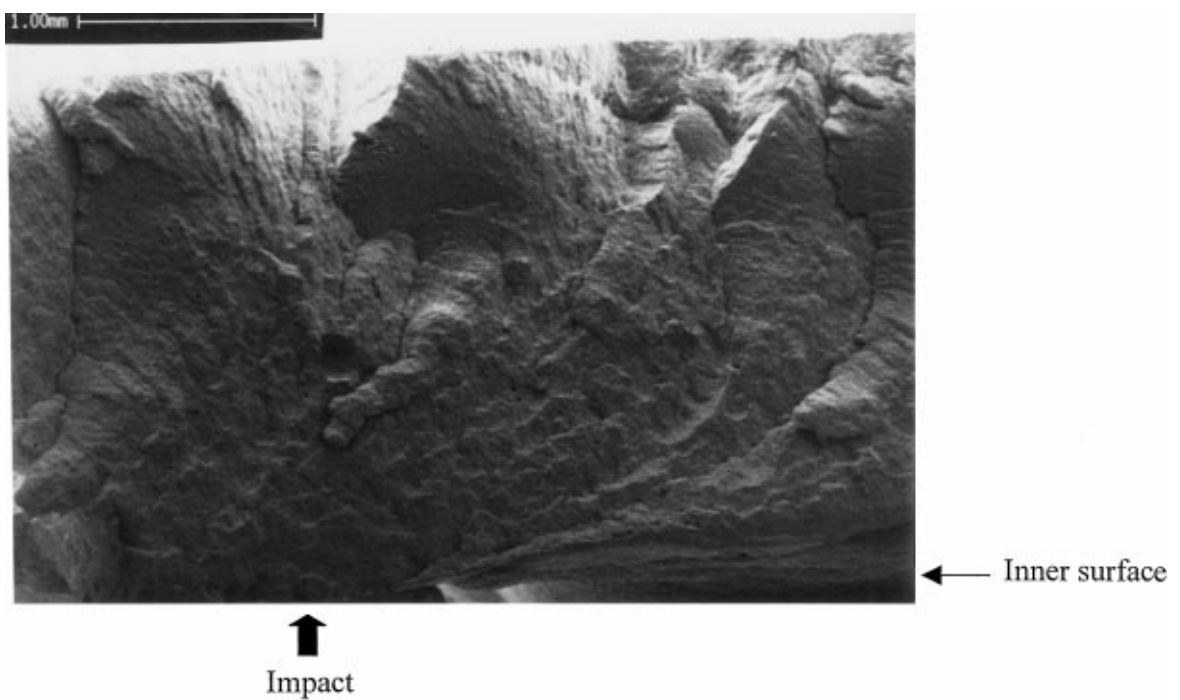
Fracture surface of sample PPwater, submitted to impact on the inner surface.
